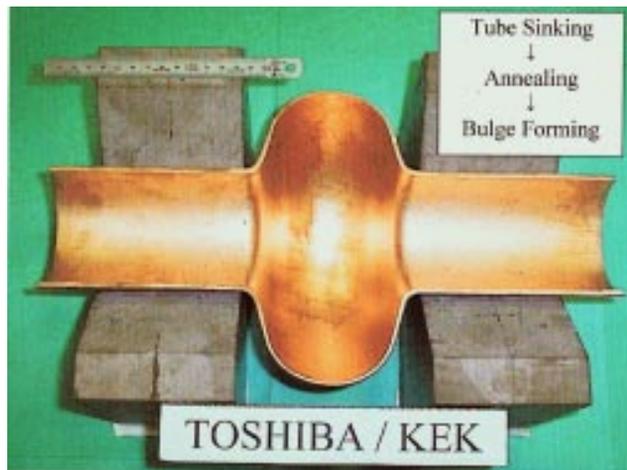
Cut of a resonator formed by explosive bulging. The die consists of four sections, each divisible into half [courtesy K. Saito].
